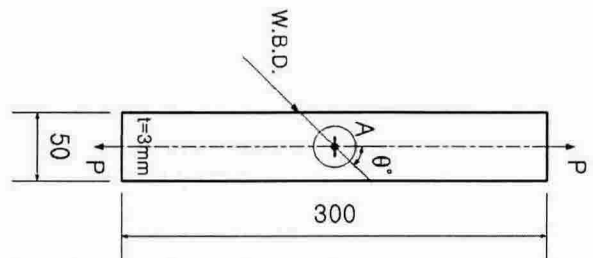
Configuration of welded steel plate specimen for fatigue test
